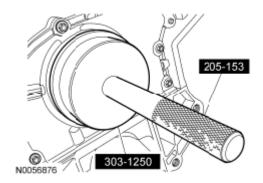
Identifying Rear Main Seal Installer And Handle Courtesy of FORD MOTOR CO.
